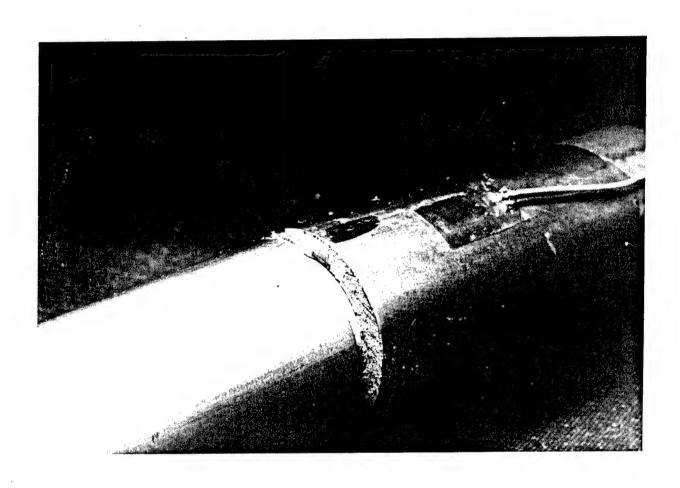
Post-test Photograph of the Fatigue Fracture in the Test Sample Track Pin. (Note: Fracture Origin at Inside Surface of Steel)
